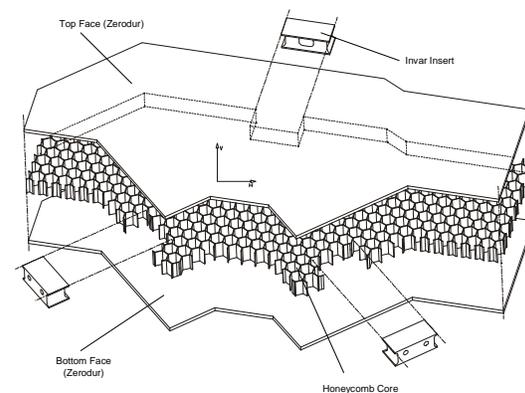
Exploded view of the Base-plate built for the Aladin Mie Spectrometer
